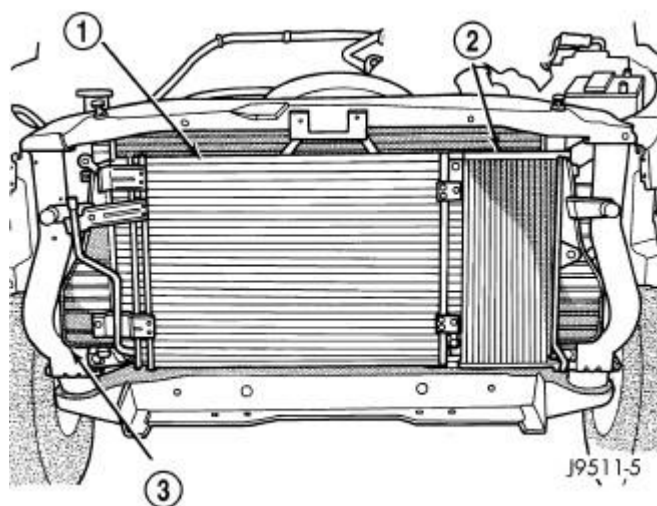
CONDENSER AND TRANSMISSION AUXILIARY COOLER
